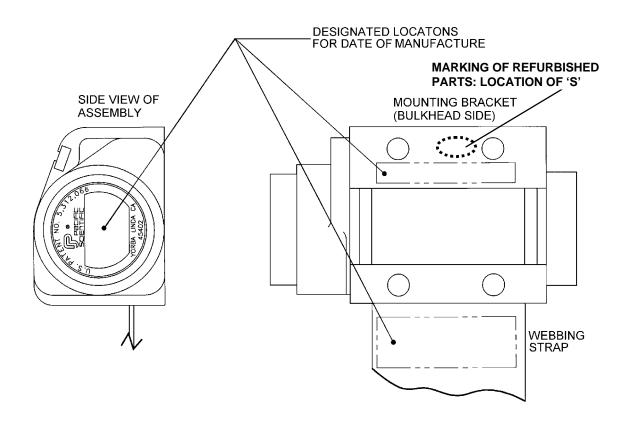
Location of Manufacturer's Date and Marking of Refurbished Parts
